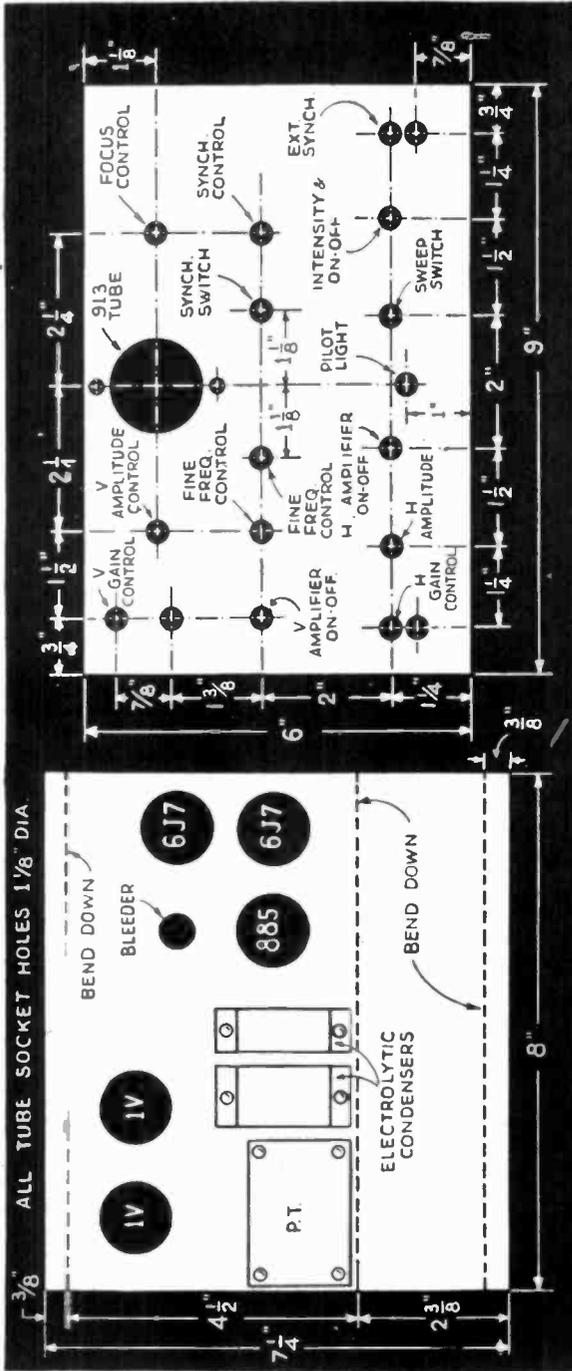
Forming and drilling details of the chassis and the front panel of the instrument. The panel engraving is also given.
